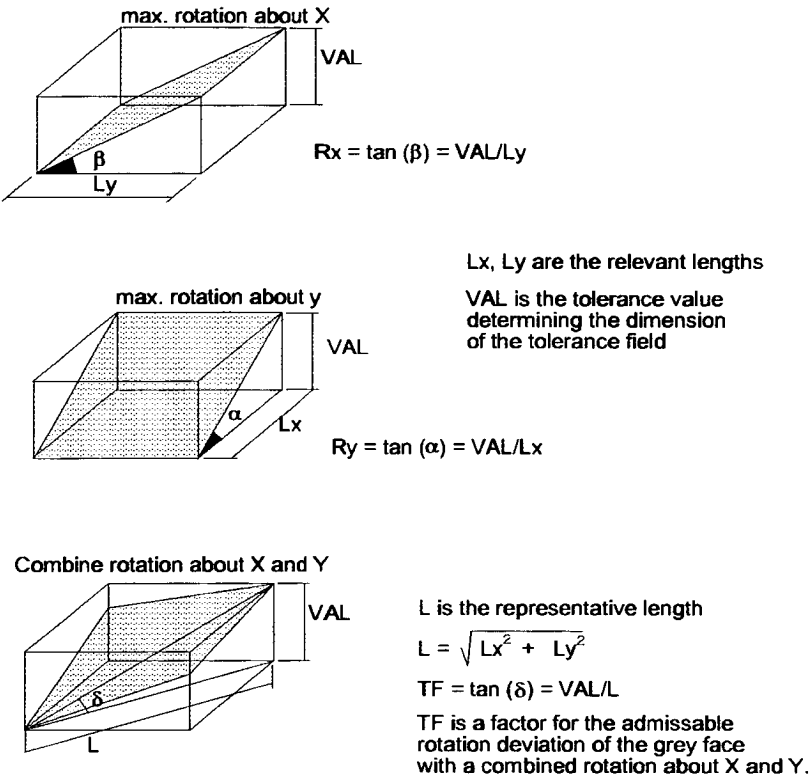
Conversion of a tolerance to tolerance factor.
